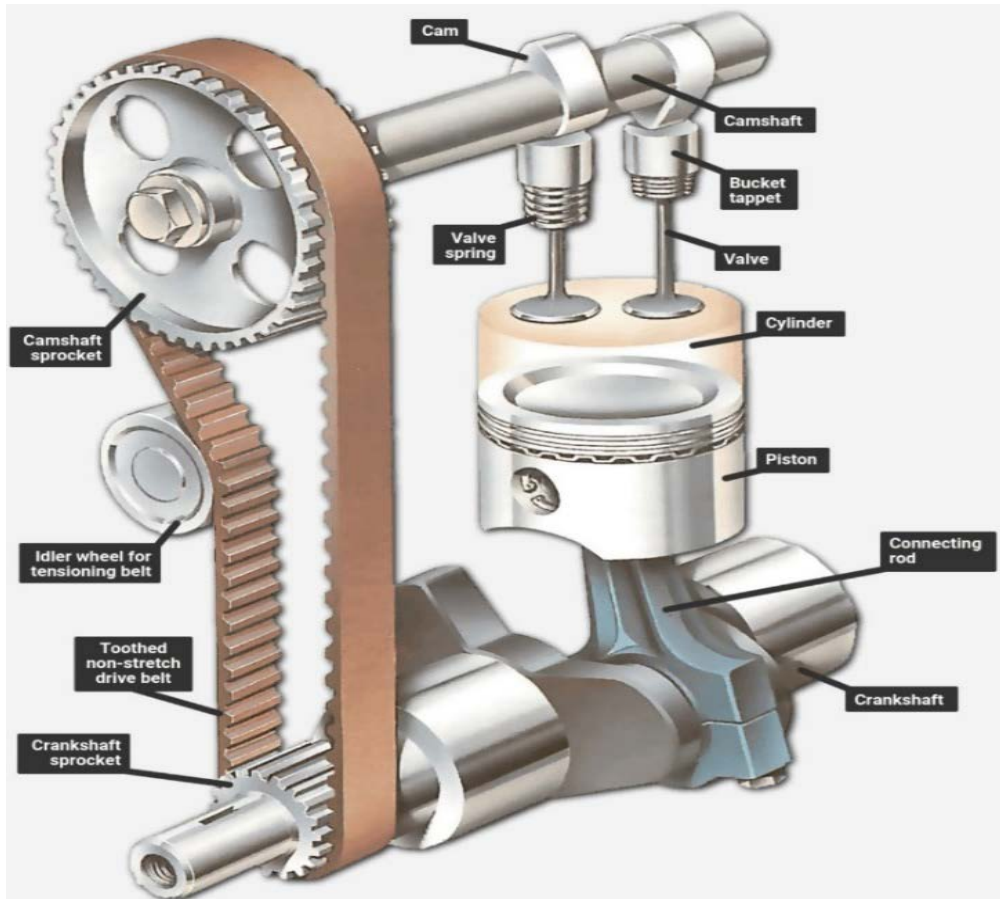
Overhead camshaft design (source: www.linkedin.com)
